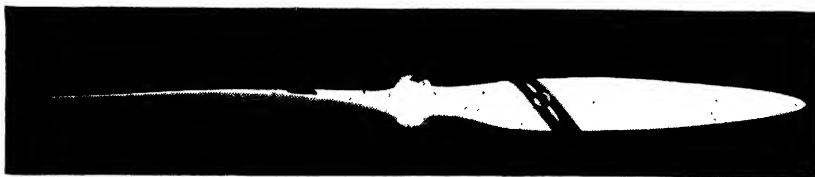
Curtiss one piece propeller. (*Curtiss Aeroplane and Motor Co., Inc.*)
